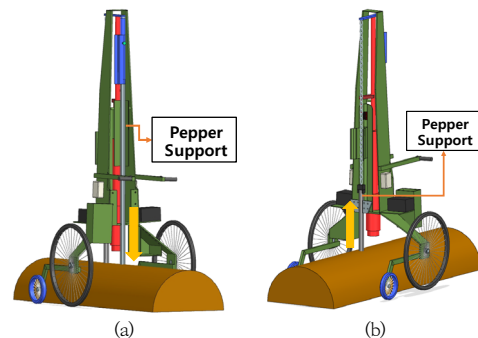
Mechanism of pepper support penetration & pull-out machine
